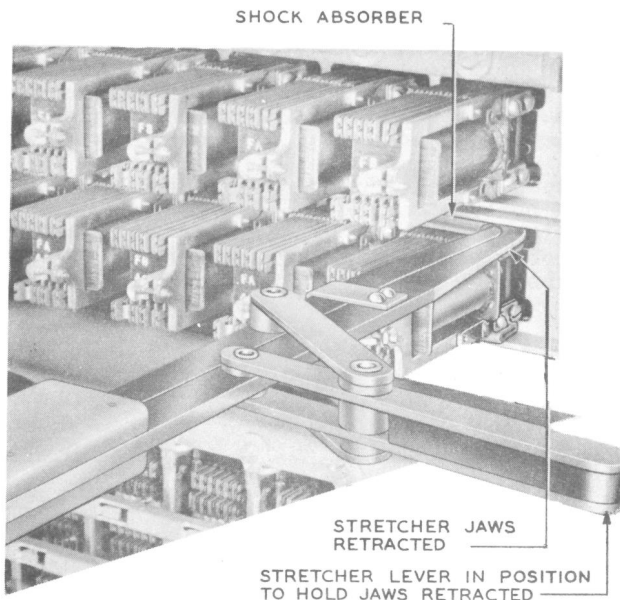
Shock Absorber Inserted Between Top of Relay and Mounting Plate Flange - Stretcher About To Be Removed
